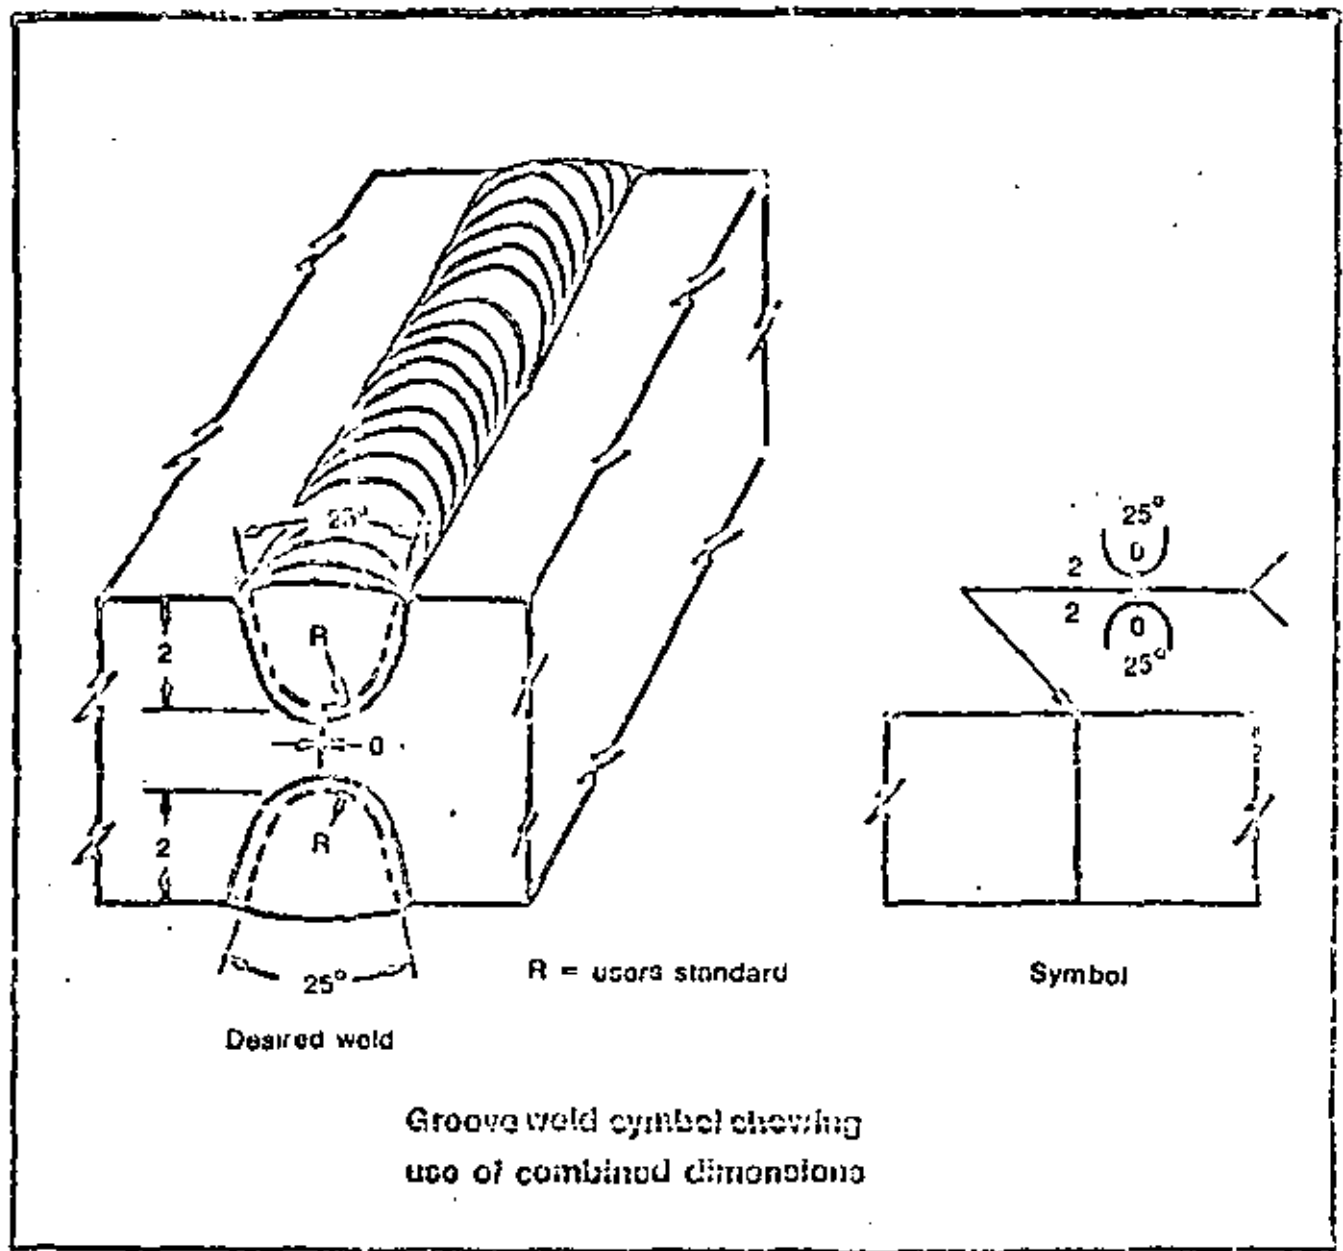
Application of dimensions to groove weld symbols.
